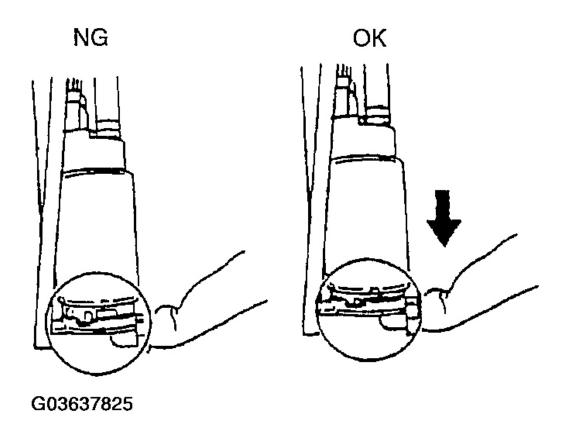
Installing FP To Bracket Courtesy of MAZDA MOTORS CORP.
